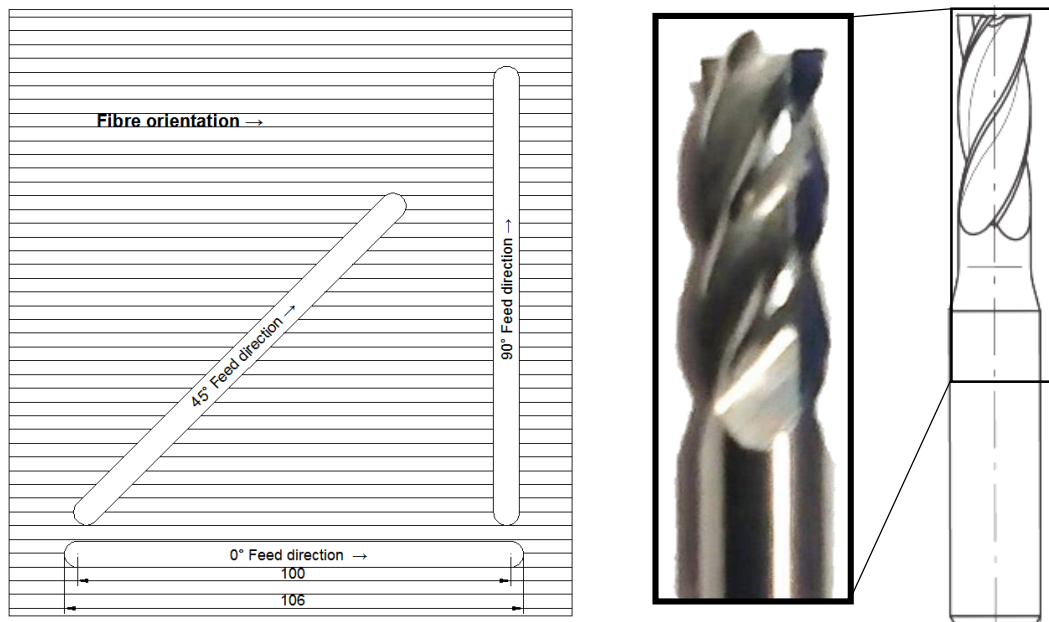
Schematic view showing the milling positions with feed direction (left) and Carbide cutting tool DIN 6527 (right).
